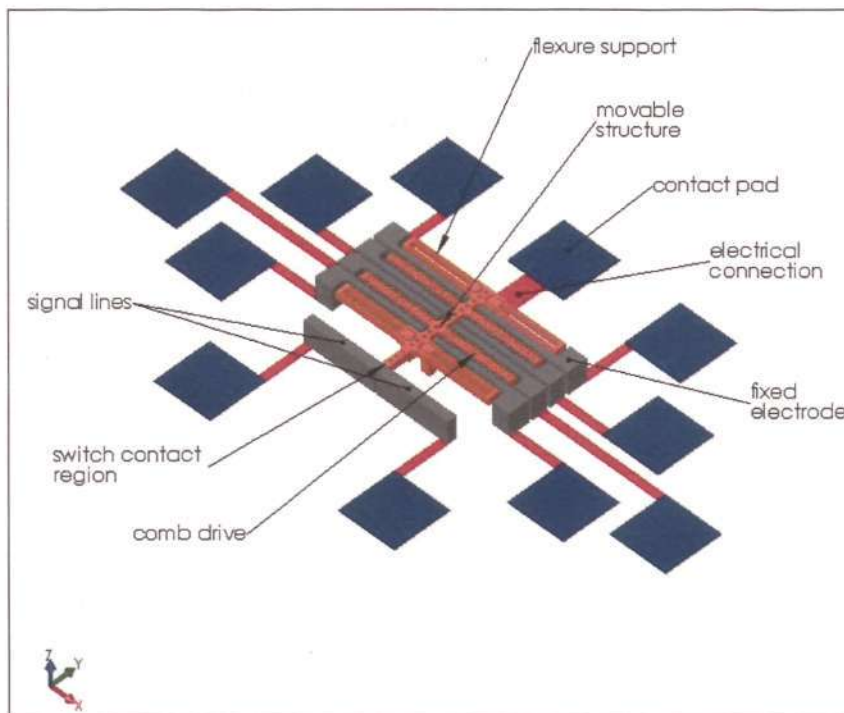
Schematic of the microactuator switch assembly (isometric view)
